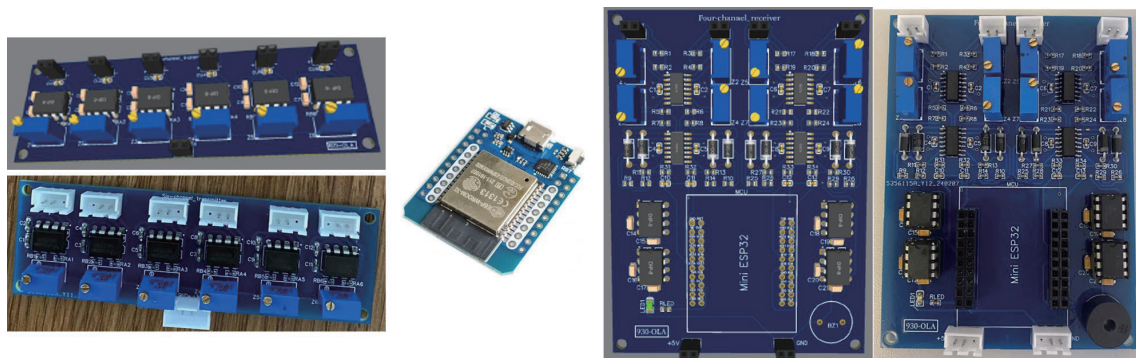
(Color online) Printed circuit boards of final components of entire system.
